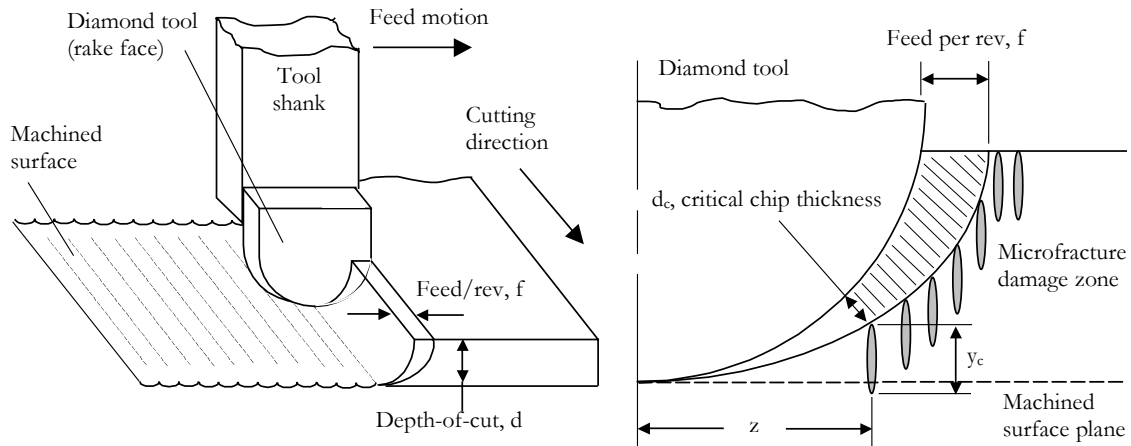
Schematic representation of chip formation and machining damage after Blake et. al. [36]. The critical chip thickness is defined as the chip thickness at which subsequent tool passes are unable to remove damage from the previous tool passes.
